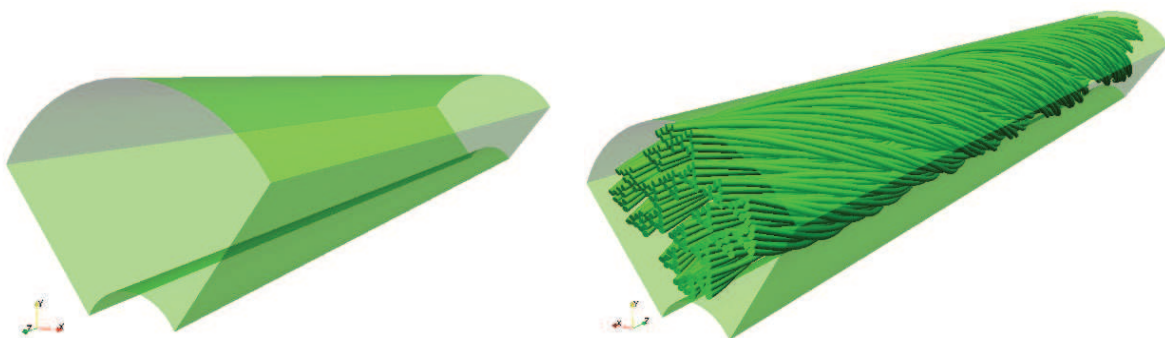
Illustration of petal tool around initial strand assembly (3x3x5x4).
